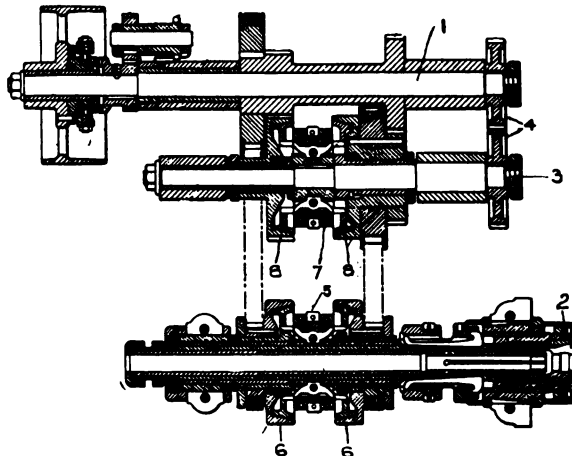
CONSTANT SPEED DRIVE FOR SCREW MACHINE PROVIDED WITH AUTOMATIC REVERSE AND SPEED CHANGE. BROWN & SHARPE MFG. CO.
